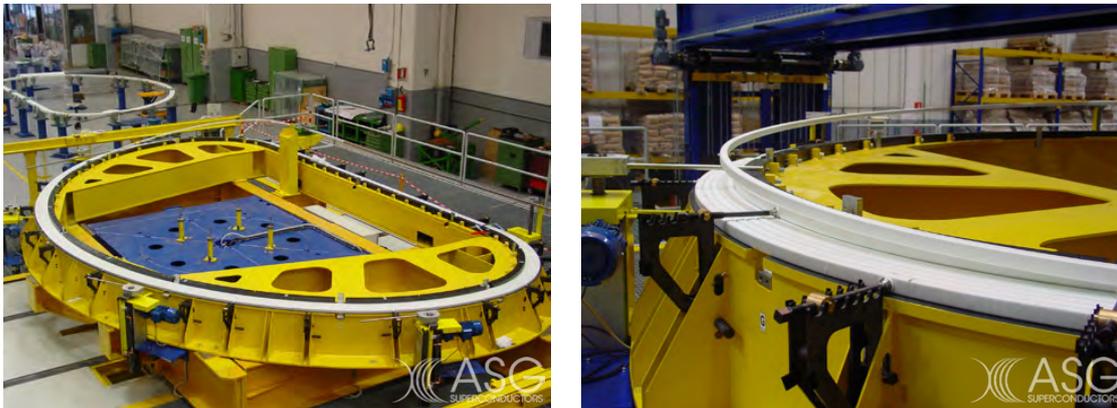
, 16 DP winding completed / Winding of DP 2nd layer
